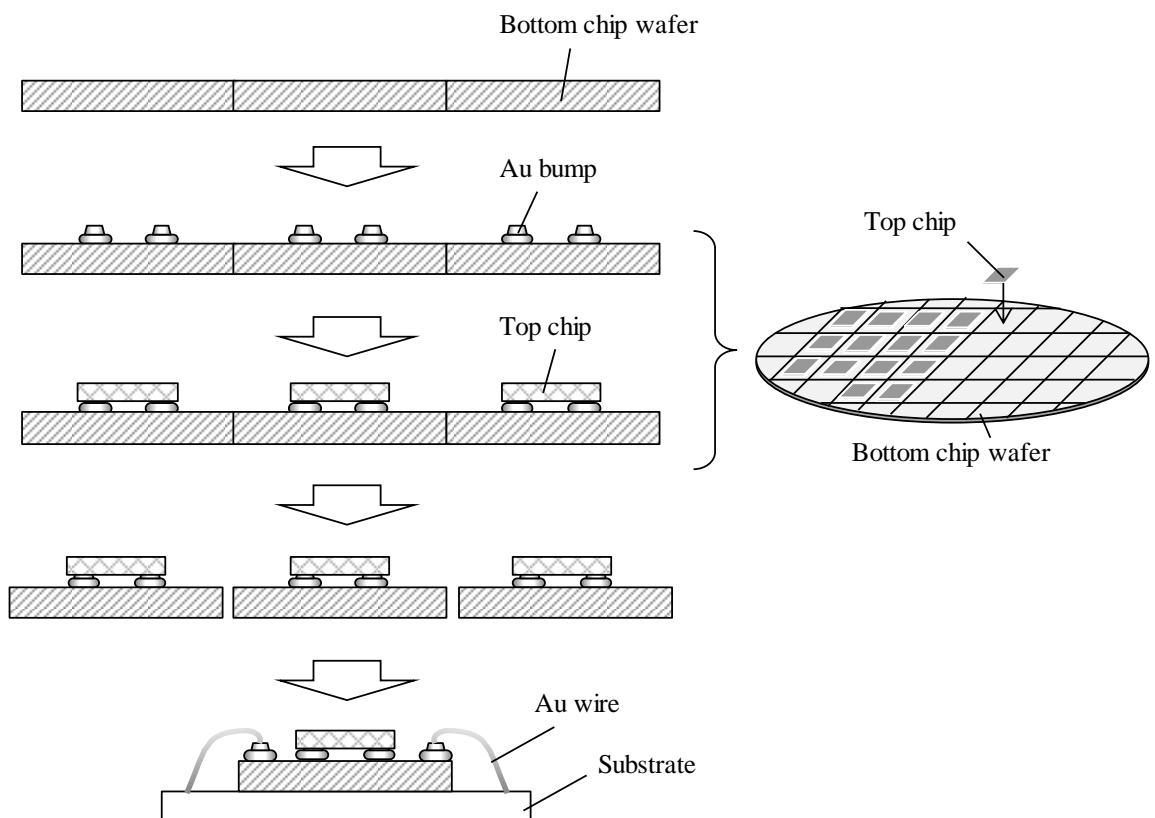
Assembly method of Chip on Chip bonding in which top chips are bonded on bottom chip wafer continuously.
